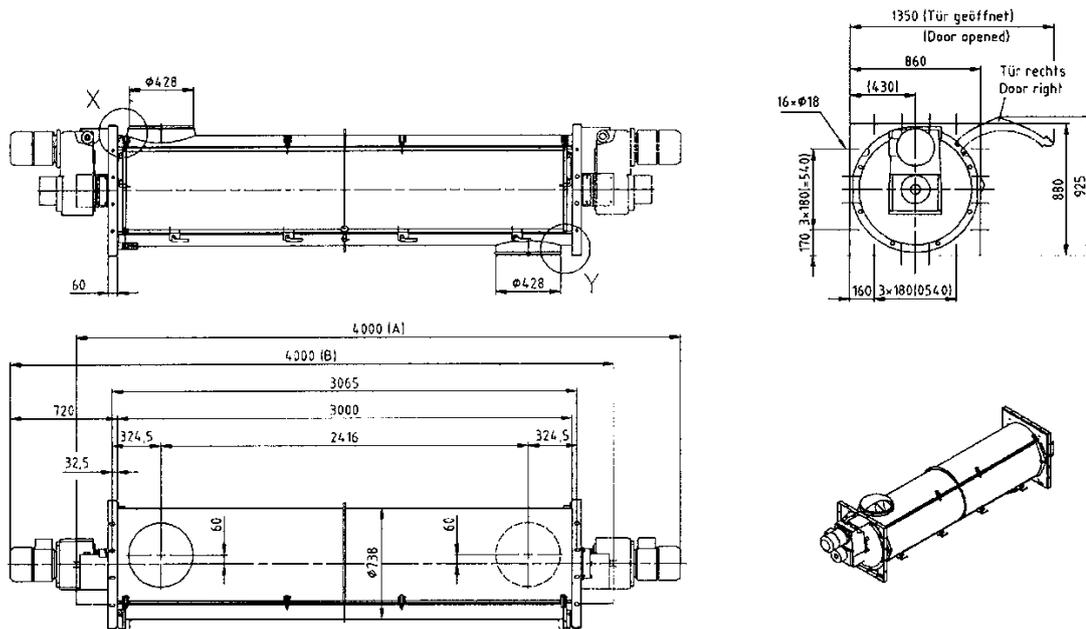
Dimensioned drawing Retentioner 1300 right
